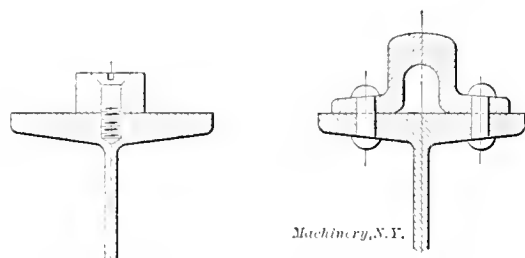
Methods of Attaching the Rail to the Beam Girder
